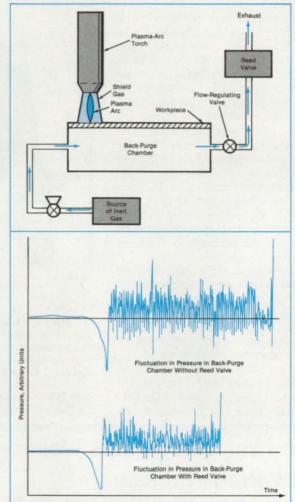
The Pressure of an Inert Gas in the back-purge chamber is kept more nearly constant by inserting a reed valve at the exhaust of the chamber. A smoother back weld bead and more uniform penetration of the weld result.
